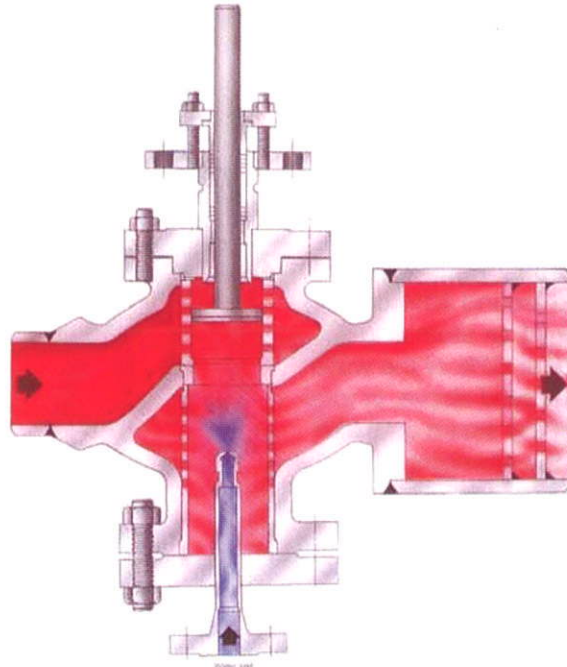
Steam conditioning valve with spray water injection near the cone through a separate nozzle
